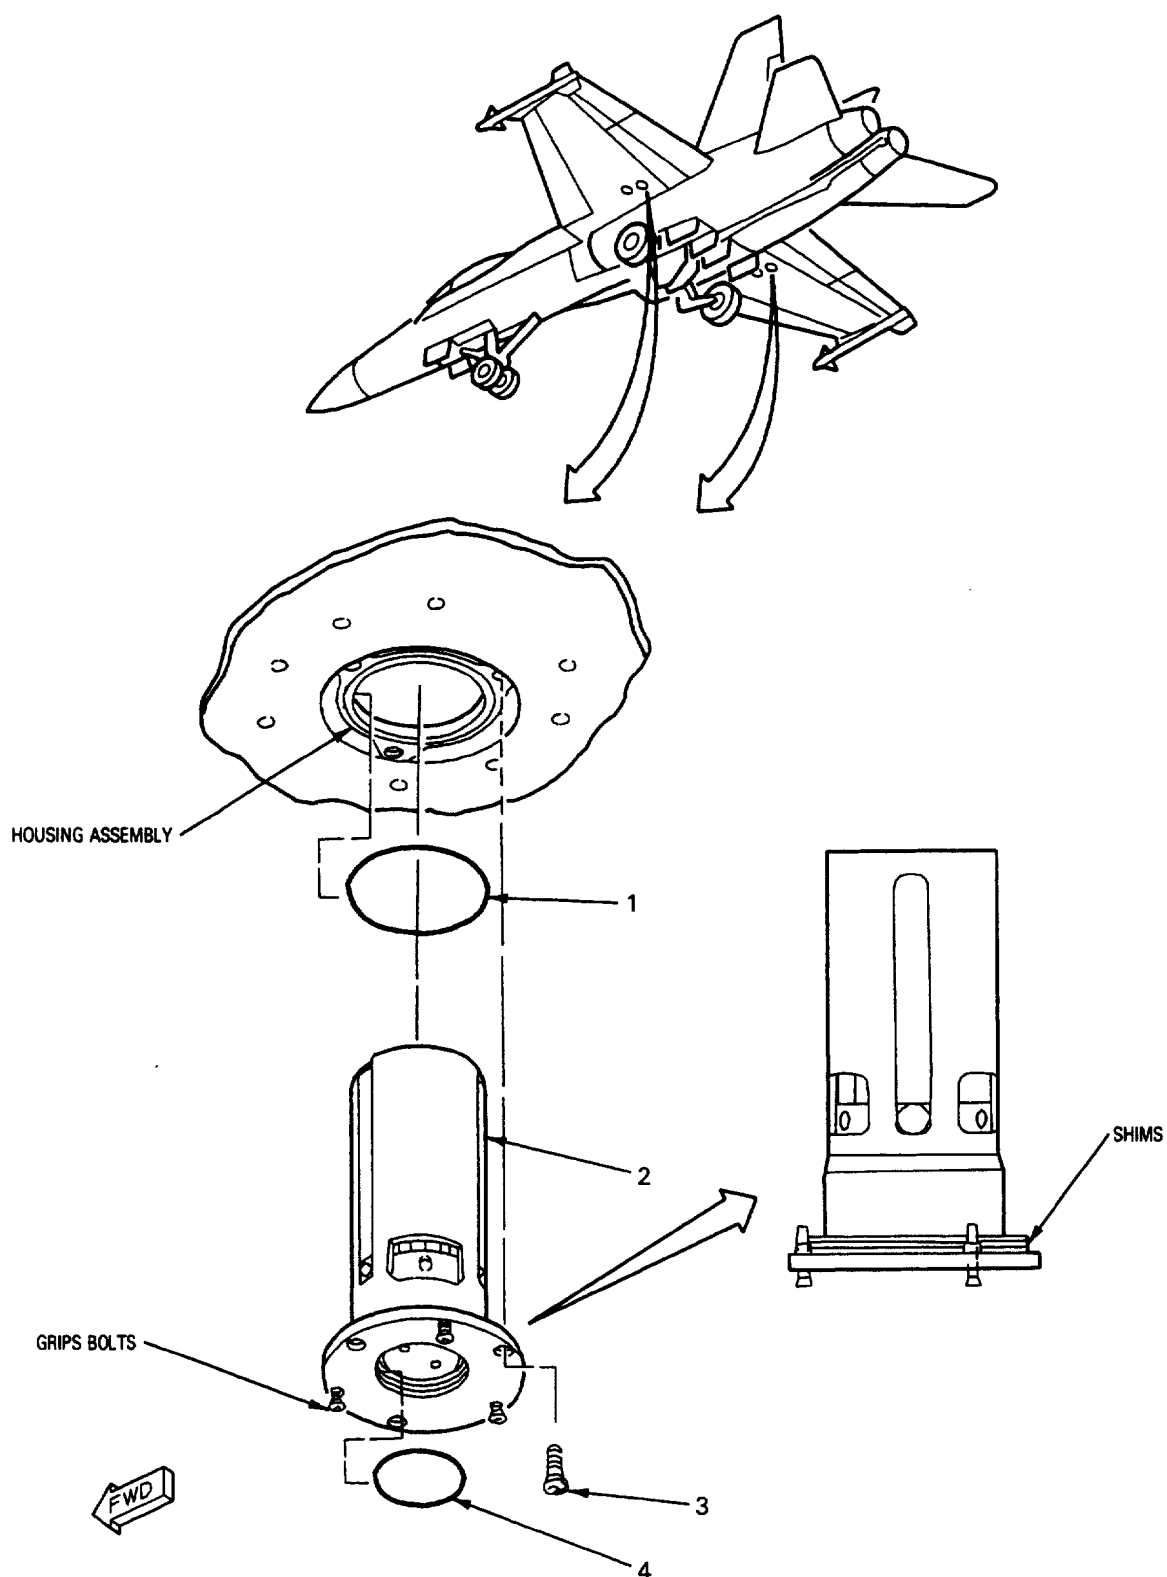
Wing Air Coupling Valve (5VAU577 or 5VAV578) (Sheet 2)
